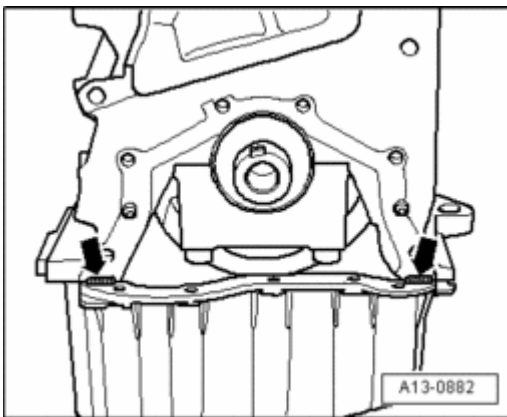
Applying Thin Bead Of Sealant To Edge Between Cylinder Block And Oil Sump
